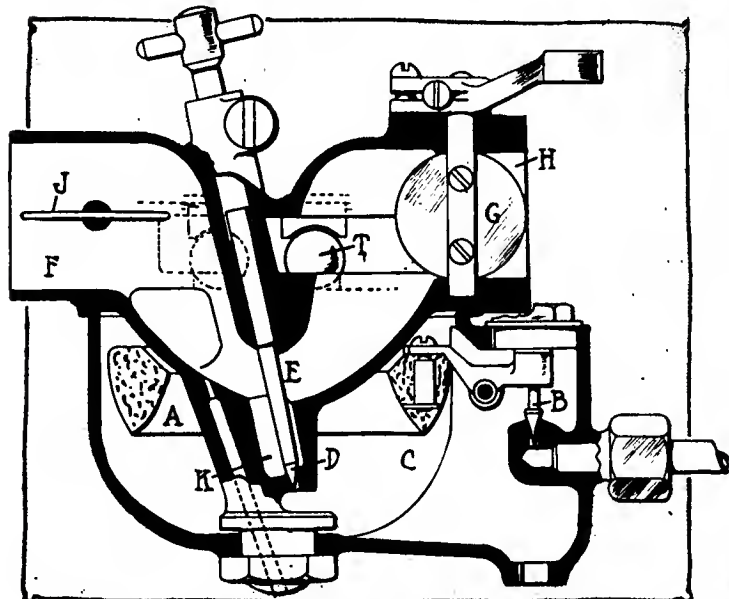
Kingston carburetor uses concentric float and ball auxiliary air valves
